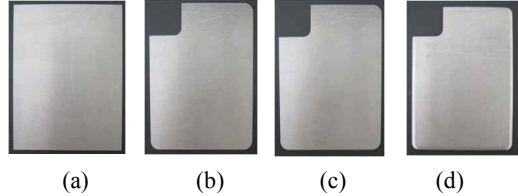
Formed shapes of the SSD case obtained from the pilot test: (a) shearing; (b) notching; (c) idle; (d) bending
